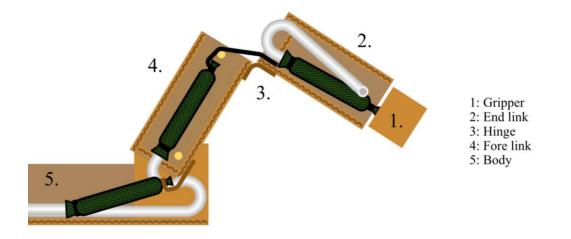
Illustration of side cutaway of the arm mechanism used for collection in the sample-prototype iteration.
